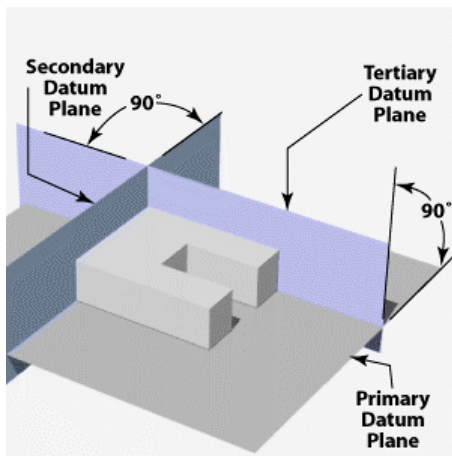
The datum reference frame with a rectangular plate
